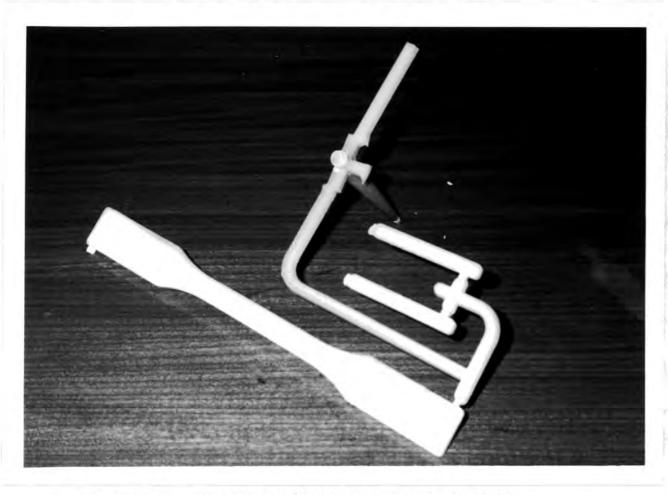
ONE SHOT MOULDING OF TEST SAMPLES
